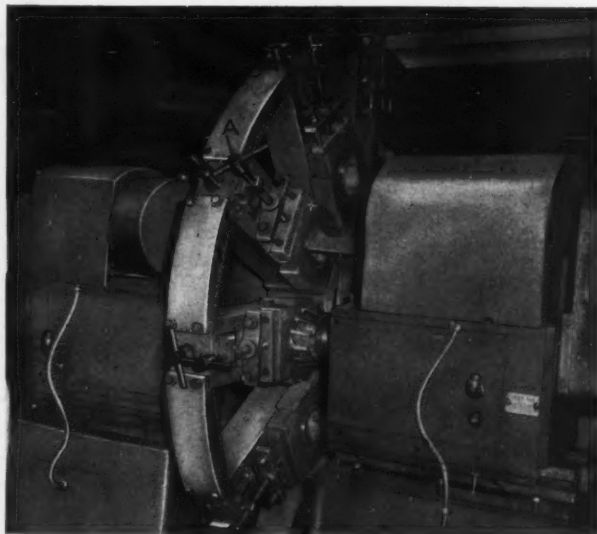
At the first operation on arm castings, on a typical line, the cover face, and the column mounting face, are milled on this rotary-drum type machine which was designed and built by the company
